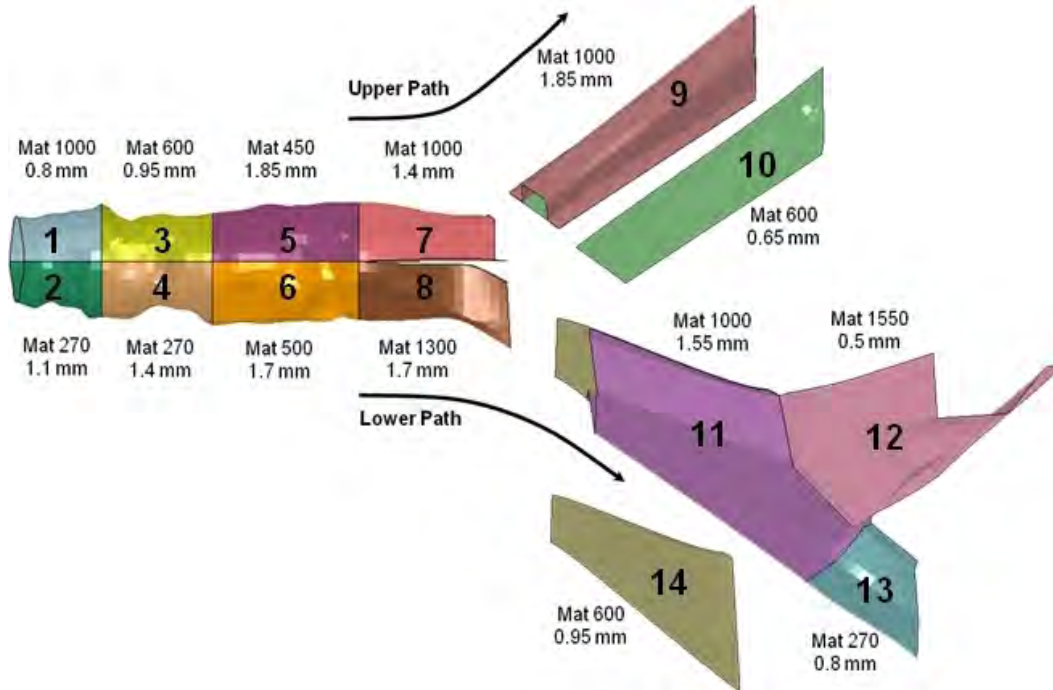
Two piece stamped front rail - final grade & gauge selections
